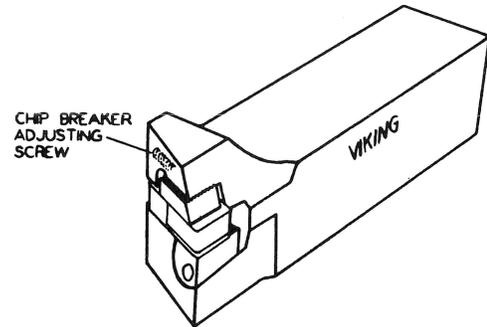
Viking Type RK-BV straight turning tool with adjustable clamped chip breaker. (Courtesy The Viking Tool Co., Shelton, Conn.)
